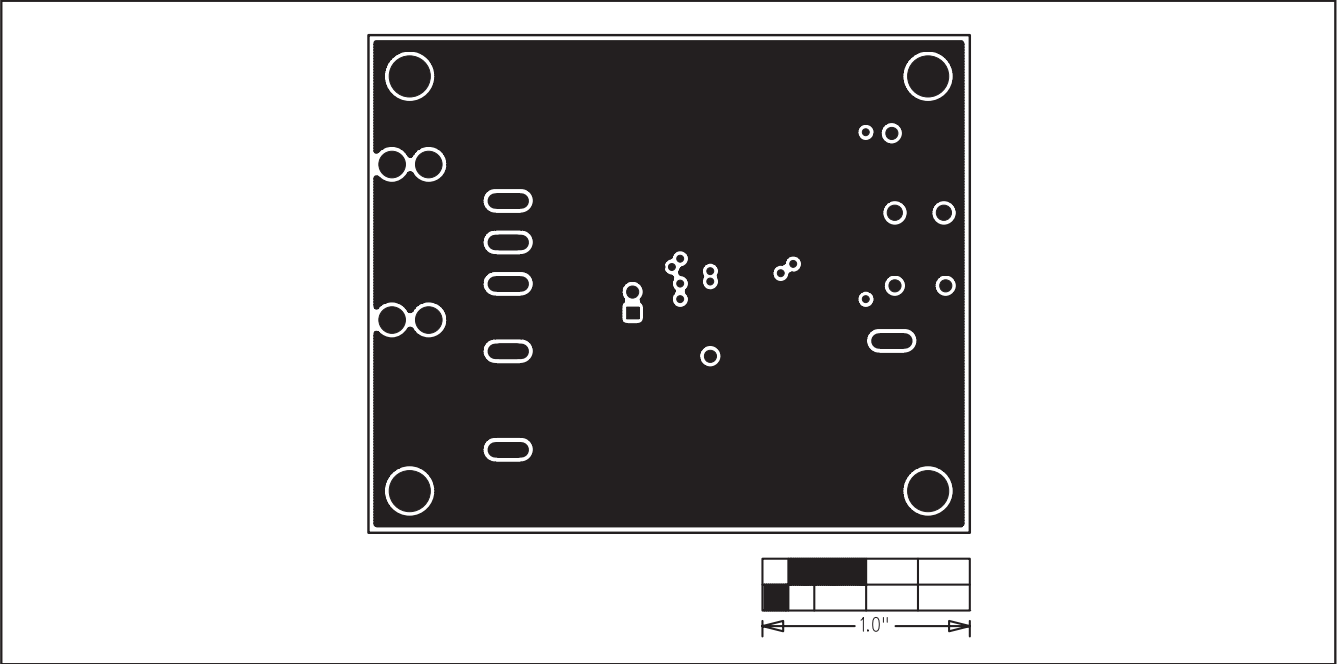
MAX13331 EV Kit PCB Layout—Internal Layer 3
